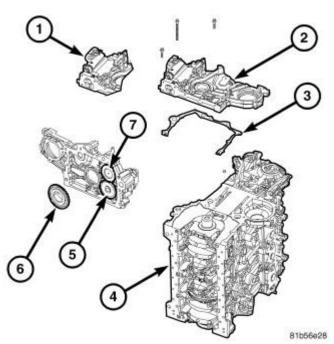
Vacuum Pump And Oil Pump Assembly Courtesy of CHRYSLER LLC
